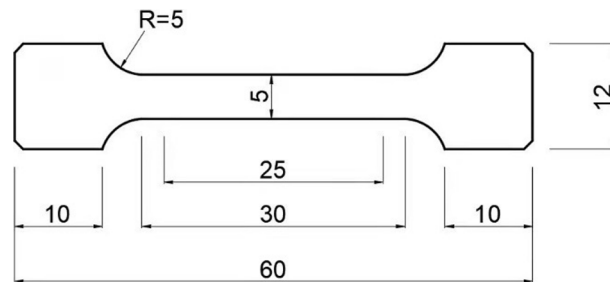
The geometry of tensile bolt model (dimensions in mm).
